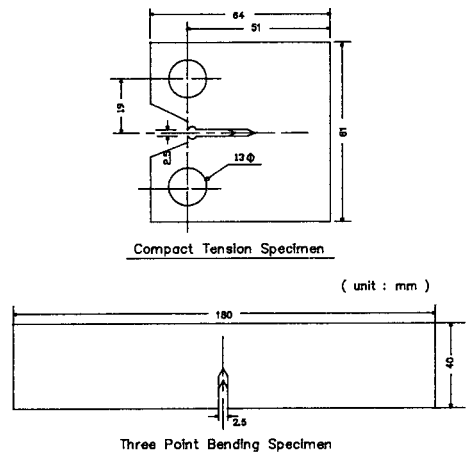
Dimensions and geometries of compact tension specimen and three point bending specimen
